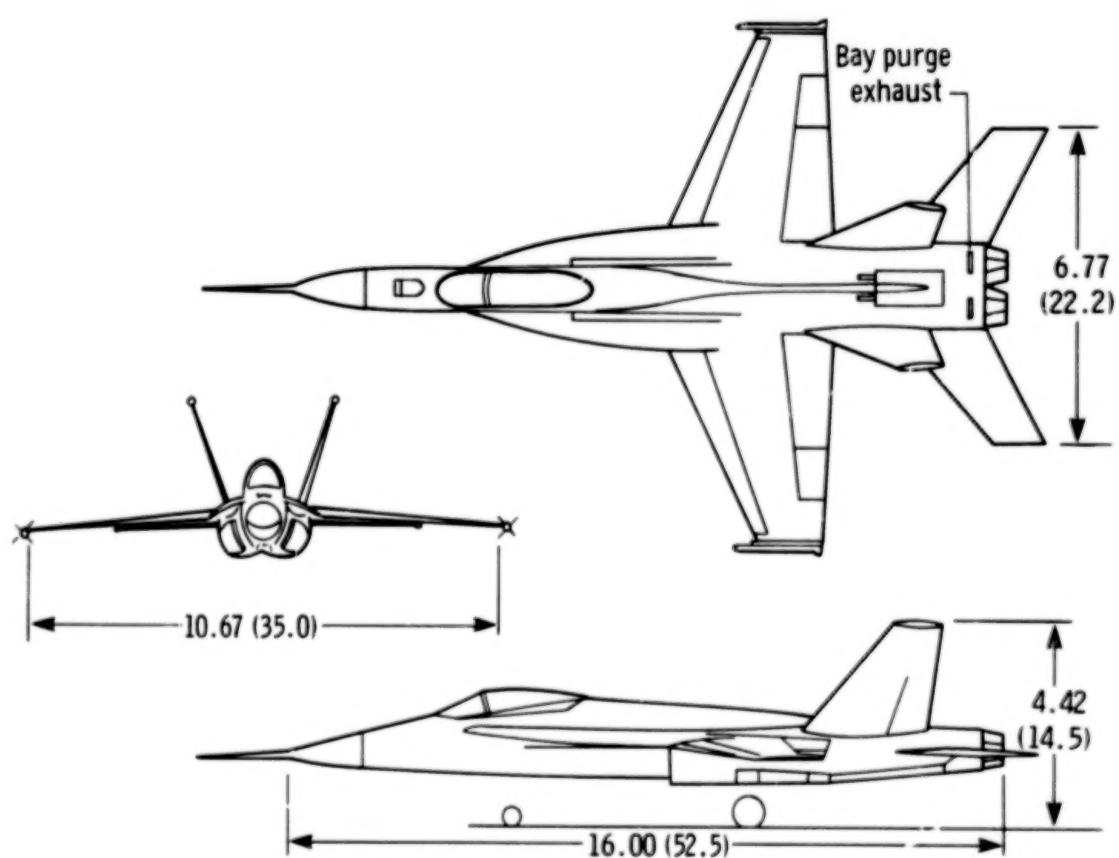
Three-view drawing of YF-17 airplane. Dimensions are in meters (feet).
